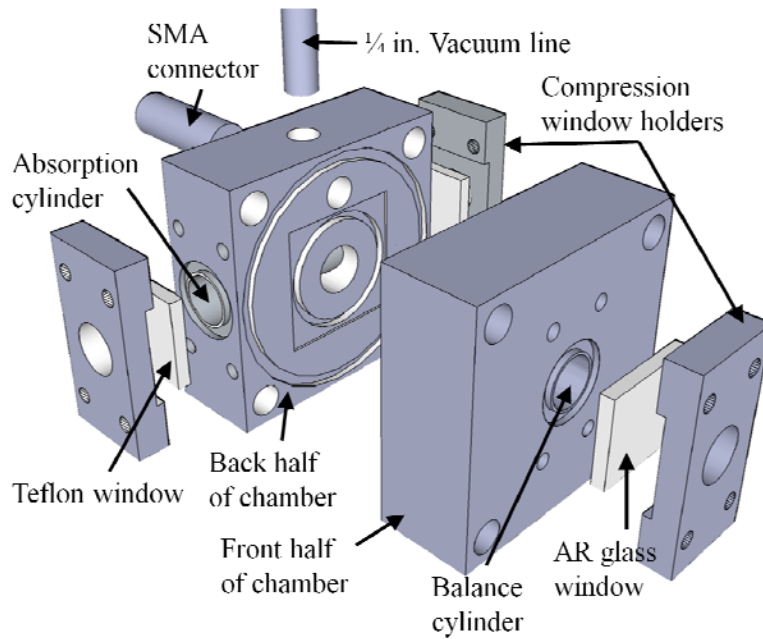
Exploded view of chamber shows the individual pieces prior to assembly.
